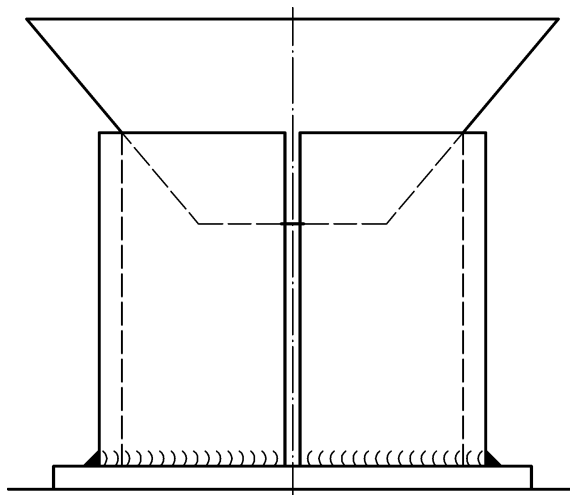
Preparation and fracture testing of test specimens for a fillet weld on pipe
